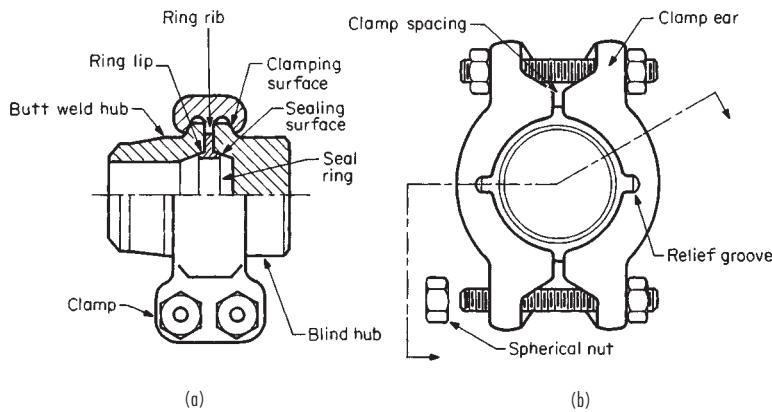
Seal-ring joint. (Courtesy of Gray Tool Co.)
